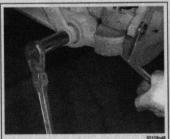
Remove the lower coil-over shock lower mounting bolt and nut from the control arm
